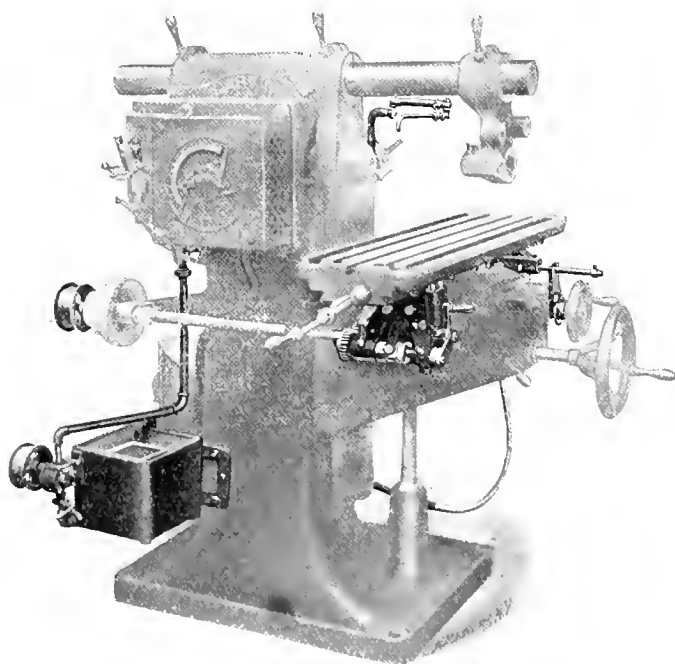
Automatic Slot Milling Attachment applied to Garvin Plain Milling Machine.
